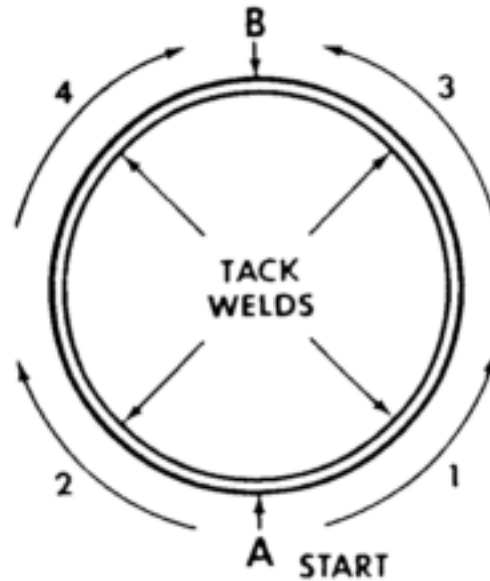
Diagram of horizontal pipe weld with uphand method.
